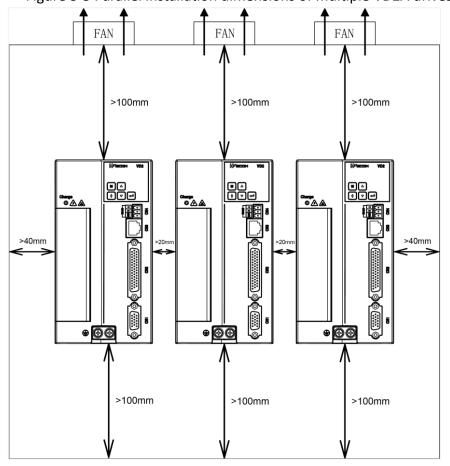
Parallel installation dimensions of multiple VD2B drives
